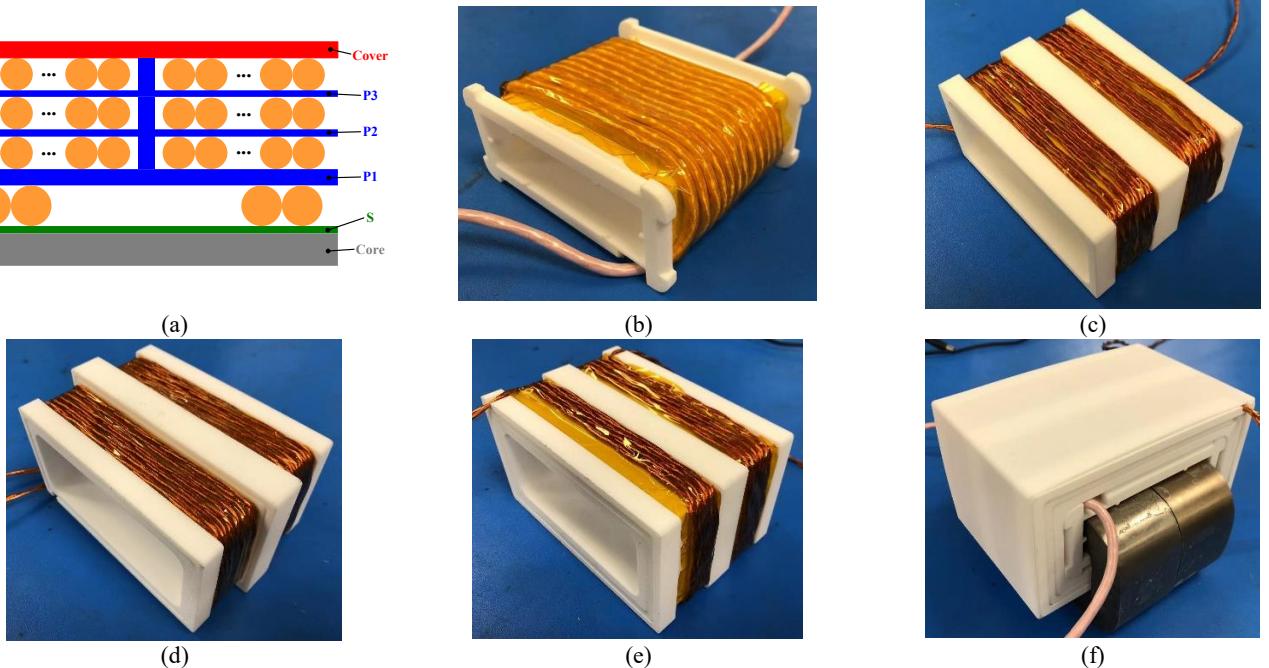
(a) An illustration of the architecture of the proposed transformer. (b) Secondary winding on bobbin S. (c) First layer of primary winding on bobbin P1. (d) The second layer of primary winding on bobbin P2. (e) The third layer of primary winding on bobbin P3. (f) The prototype of the MV transformer.
